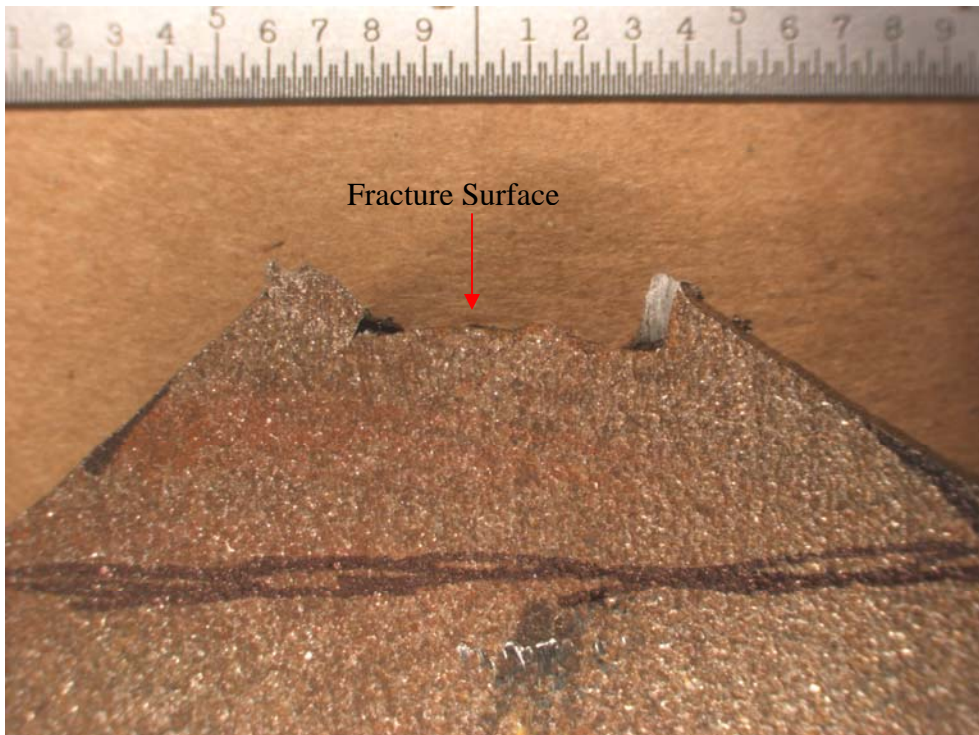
Stereoscope image of the outer surface of the cylinder section containing the fracture surface. Magnification 65X
